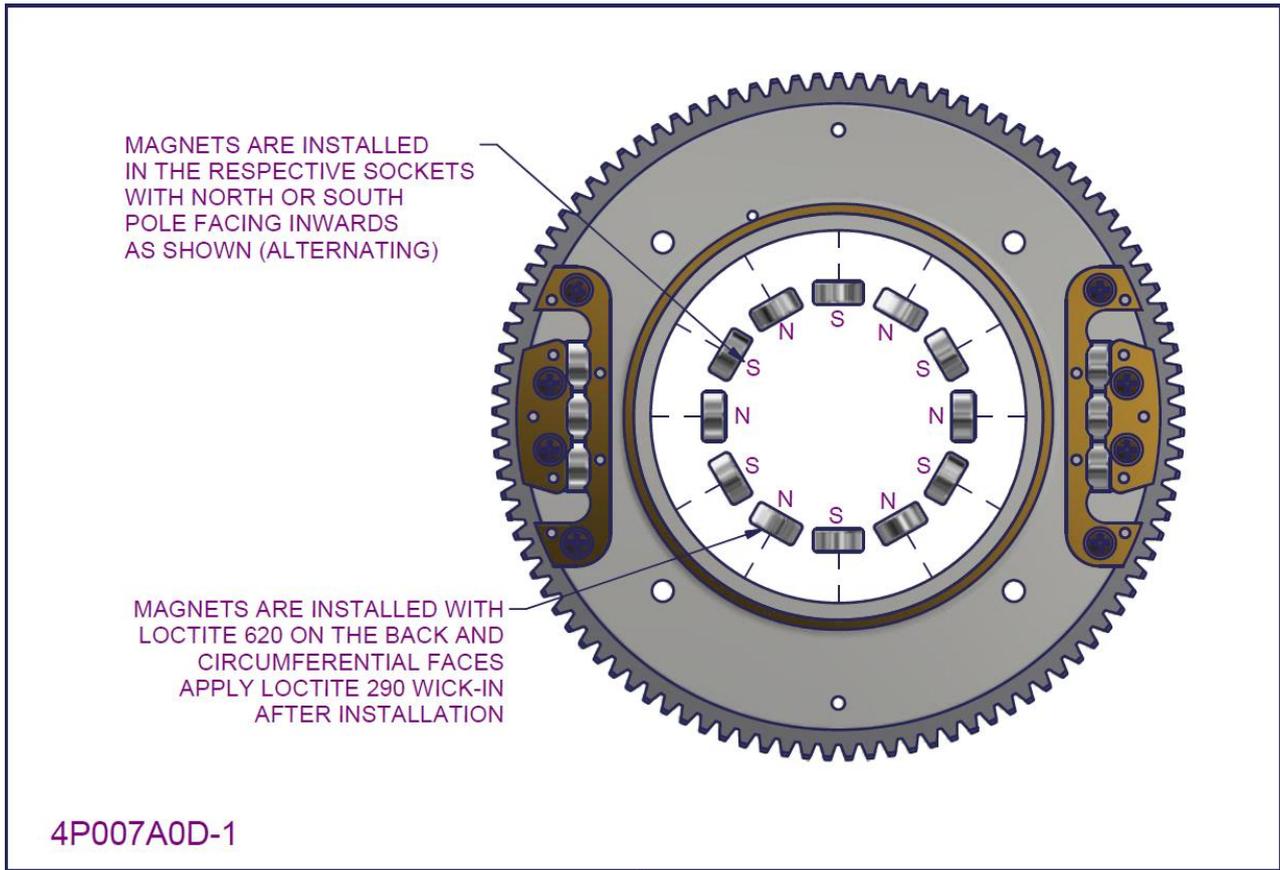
2200/3300 Flywheel subassembly (aluminium cross piece) 3
